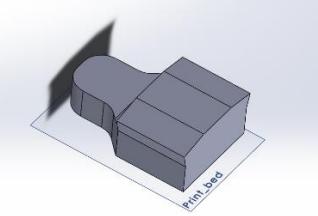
New design on pegs to hold PCB in place (for the above test design)
